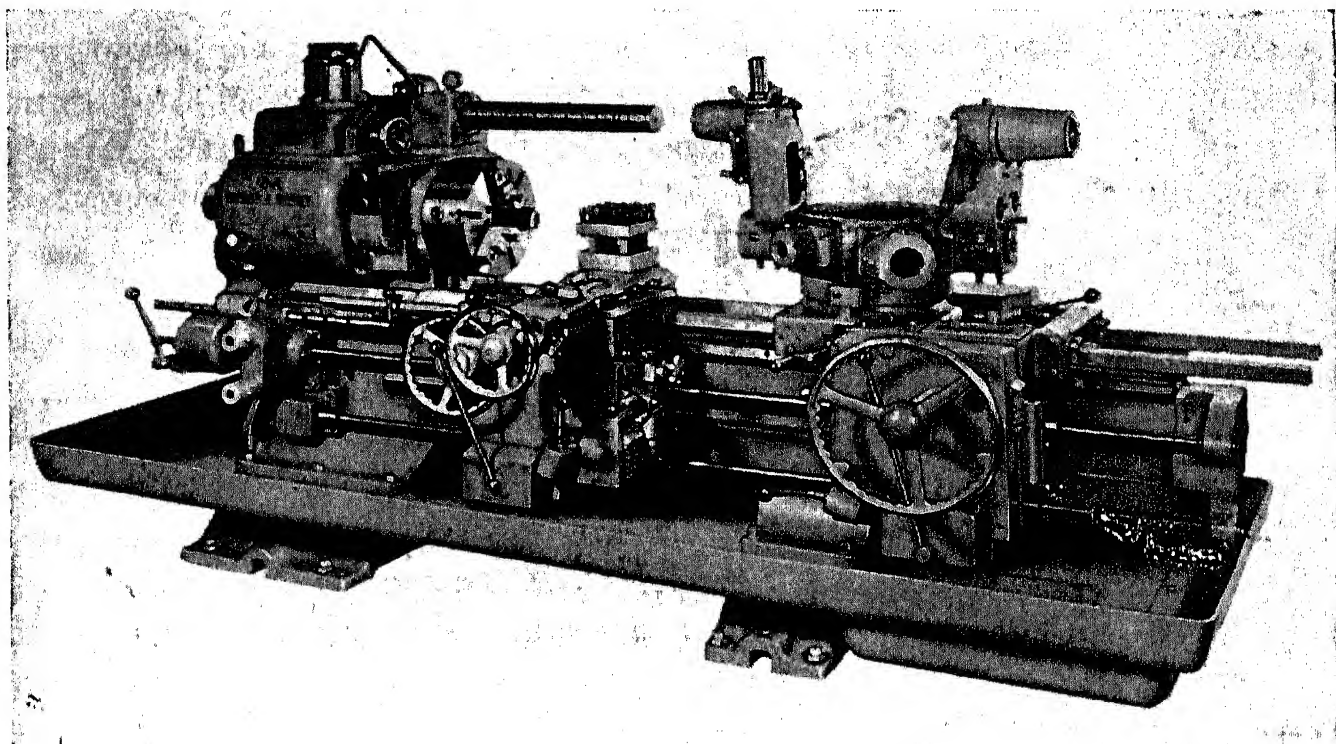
A No. 2-A saddle-type turret lathe. (Courtesy The Warner and Swasey Co.)
